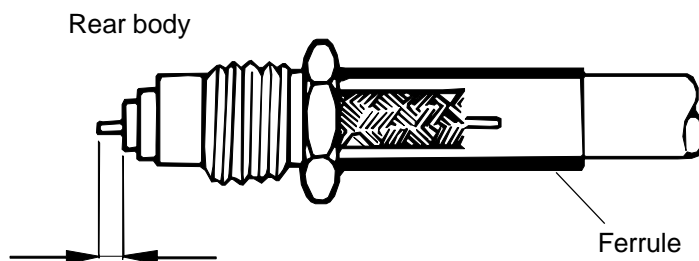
Insertion of trimmed cable into back end of rear body.
